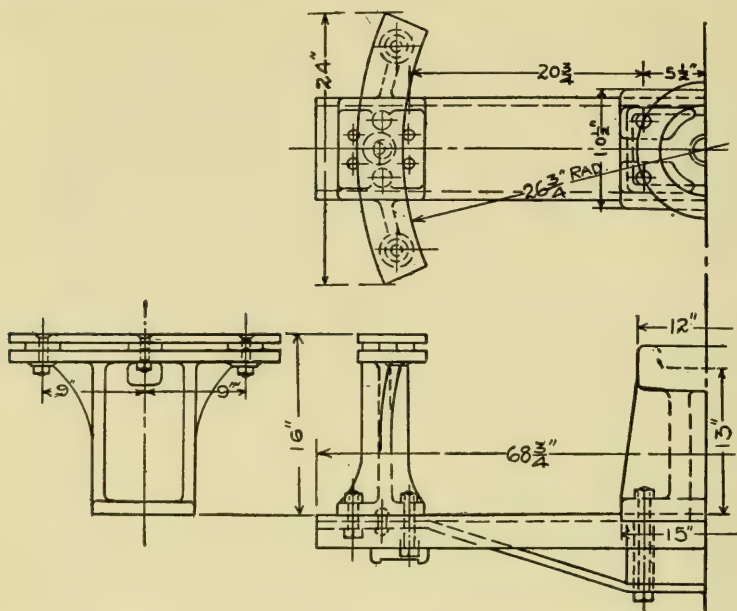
Sketch Showing Details of Changes Made in Center Plates and Side Bearings of Baldwin Trucks.
